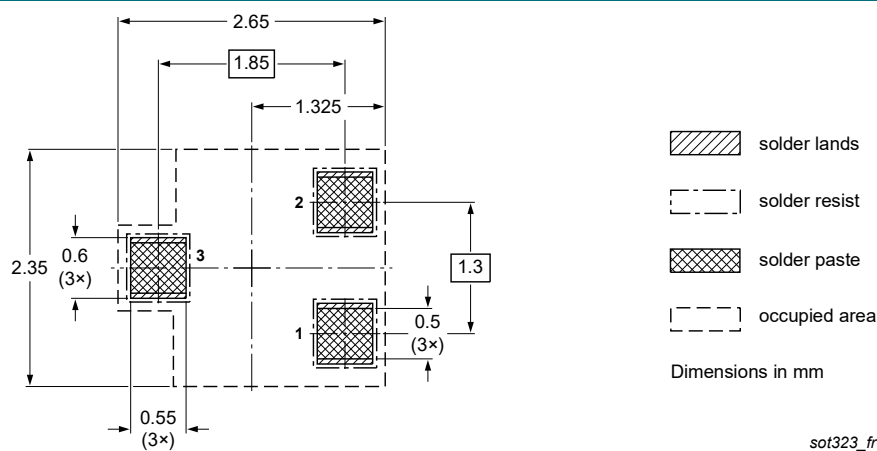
Reflow soldering footprint for SC-70 (SOT323)
